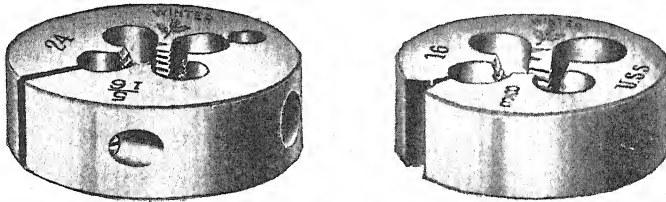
Adjustable Round Split Dies with and without Adjusting Screw; Made in Fractional and Machine-Screw Sizes.
